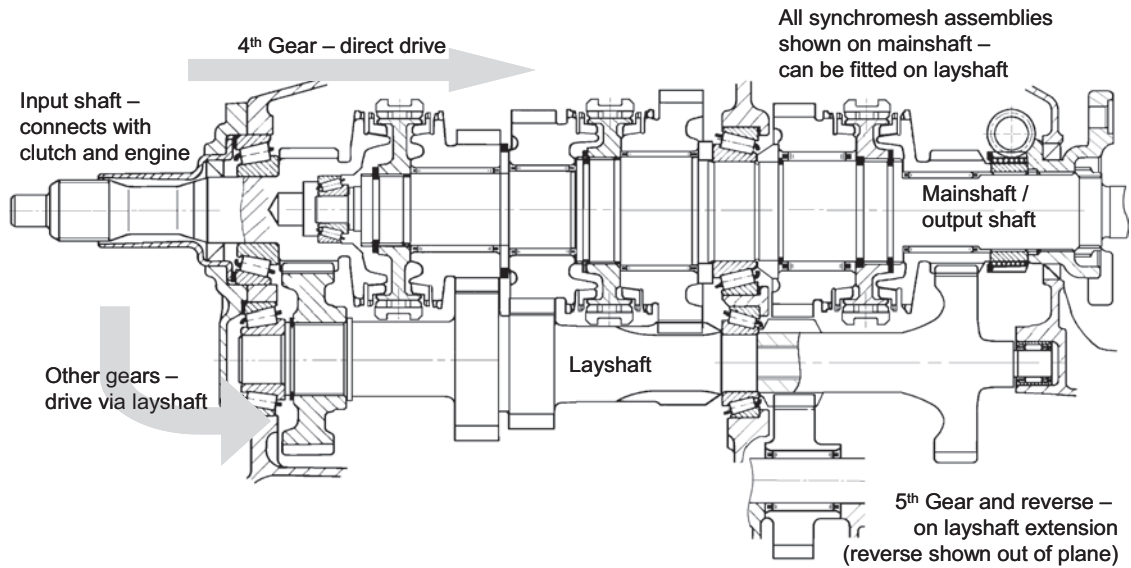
Cutaway diagram of an in-line synchromesh gear box.
